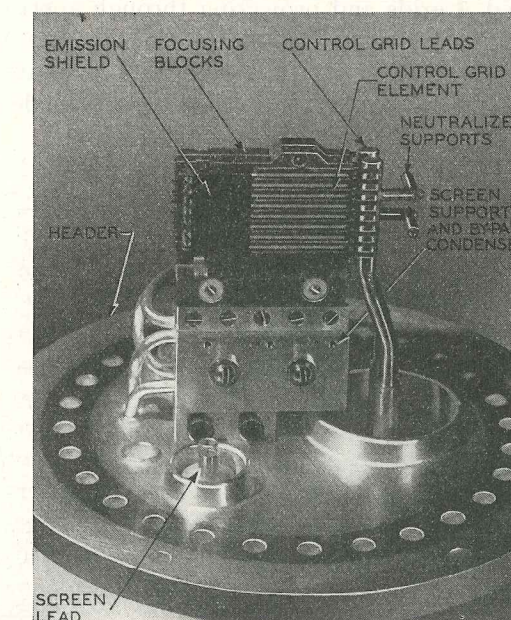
The header with filament, filament shields, No. 2 mounting blocks, and No. 1 grids mounted.
